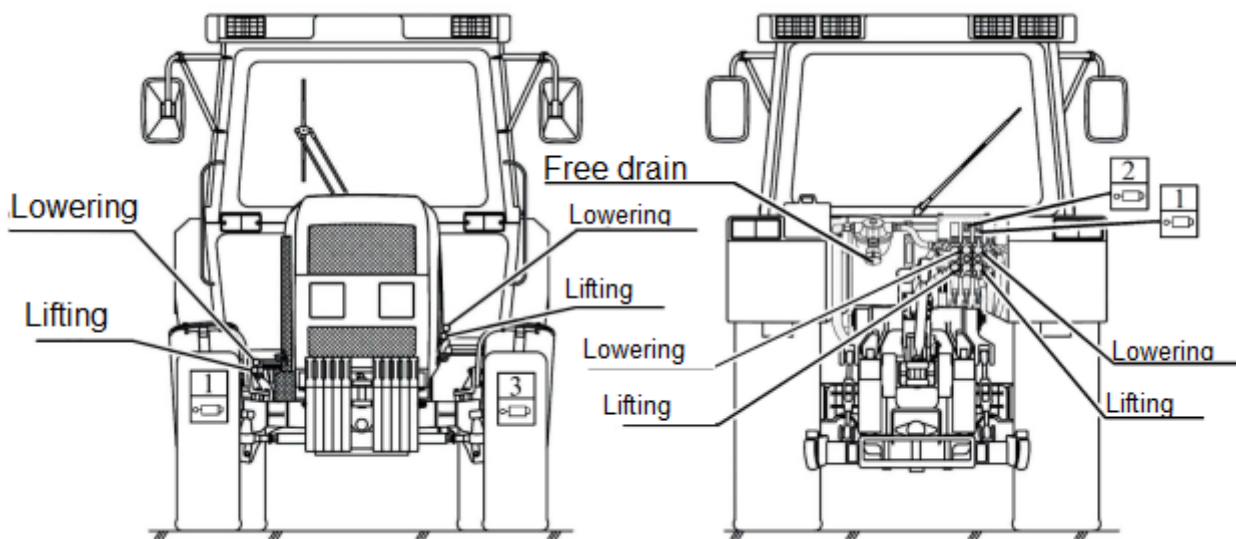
Layout and connection diagram of distributor outlets
